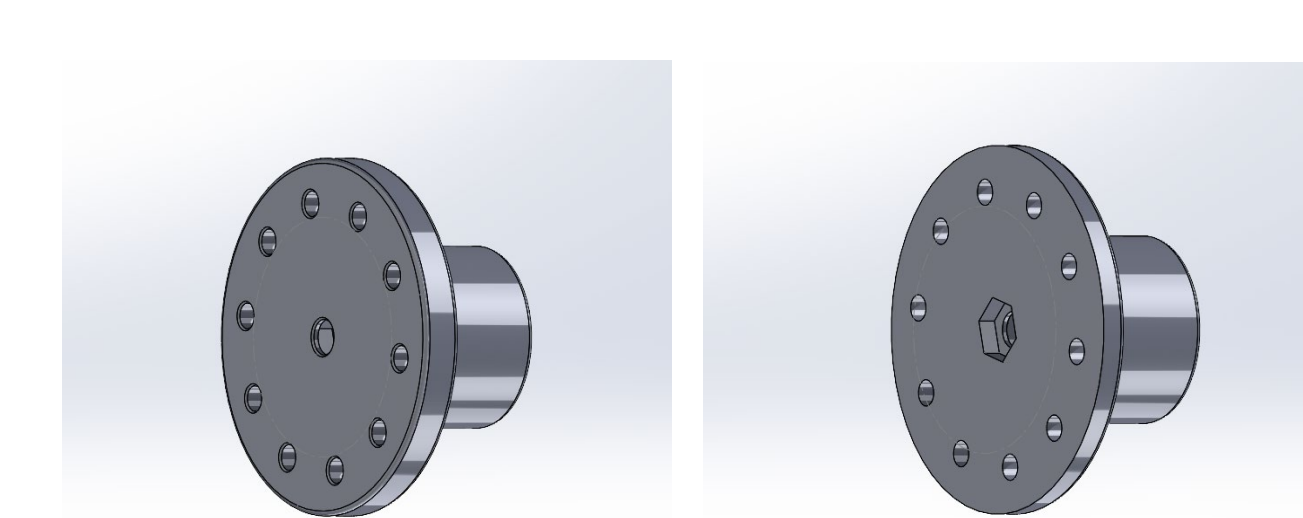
“Wrist”/Adapter plate (left) Cutaway showing in-print hex nut pocket (right)
